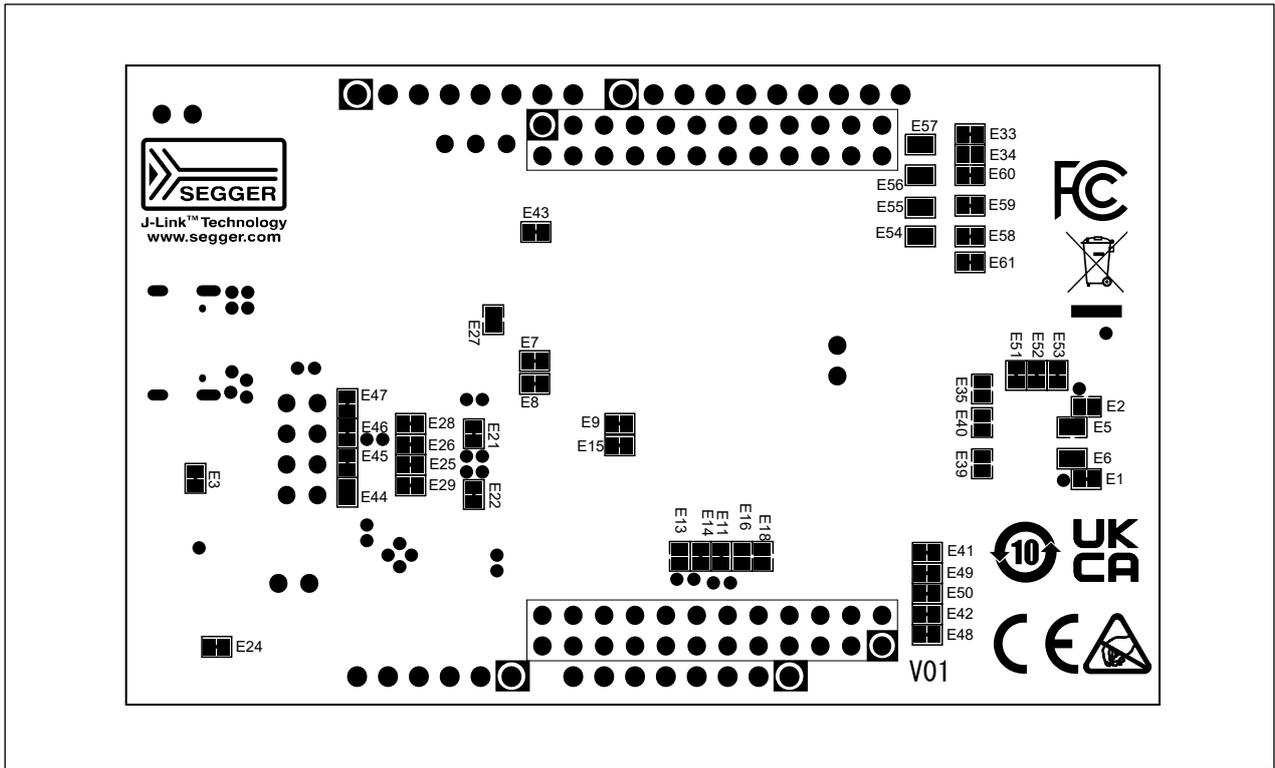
Layout Diagram of Components on the FPB-RA2T1 Board (Bottom View)
